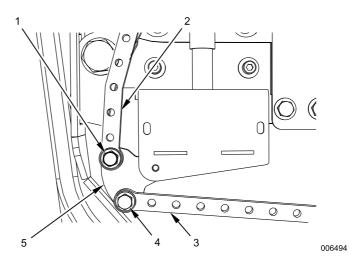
Combat Lock Shaft Lever and Vertical Shaft Lever Removal from Combat Lock Bellcrank.
